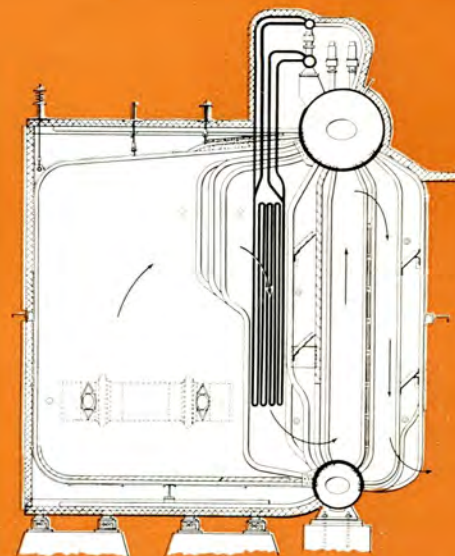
Arrangement of C-E VU-55 Boiler for superheated steam showing parallel flow baffling and bottom gas outlet.
